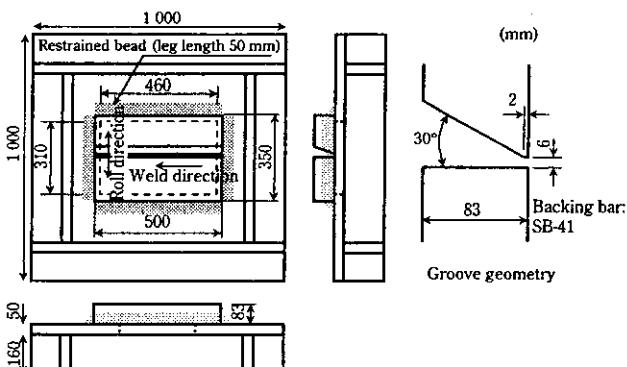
Specimen of window type restraint weld cracking test
